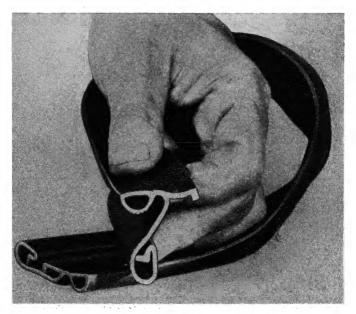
Extruded rubber-gasket strip having a lip that can be clamped between two metal plates. The means of attachment is always an important design factor in such extruded products as refrigerator gaskets.
